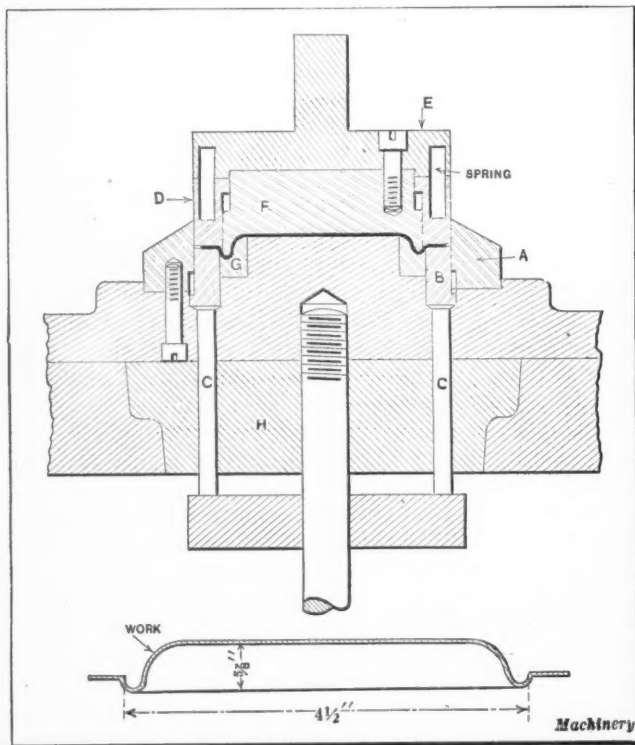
Making a Tobacco Can Cover in One Operation by Means of a Combination Blanking and Drawing Die
